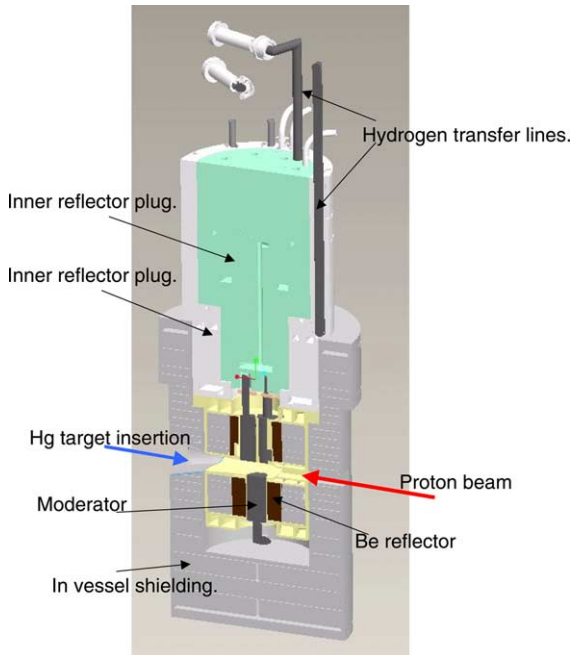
A three-dimensional CAD image of the reflector plug with moderators and hydrogen transfer lines.
